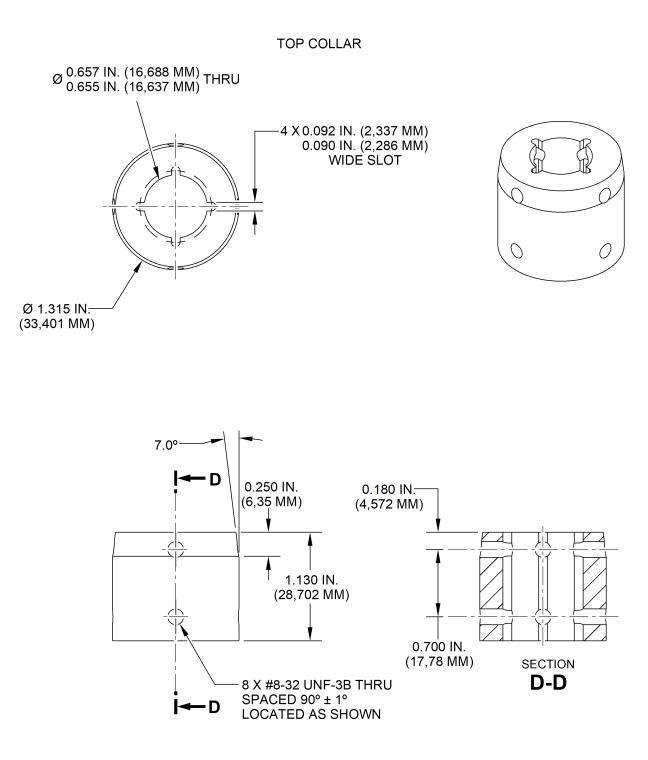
Dampener Plate Gauge (P/N 19-601076) (Sheet 4 of 4)
